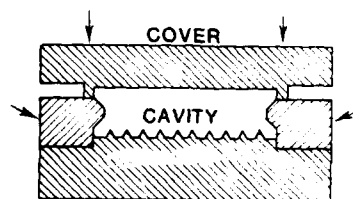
CROSS -SECTION VIEW OF THE FIBER SPLICING CHIP MOULD
